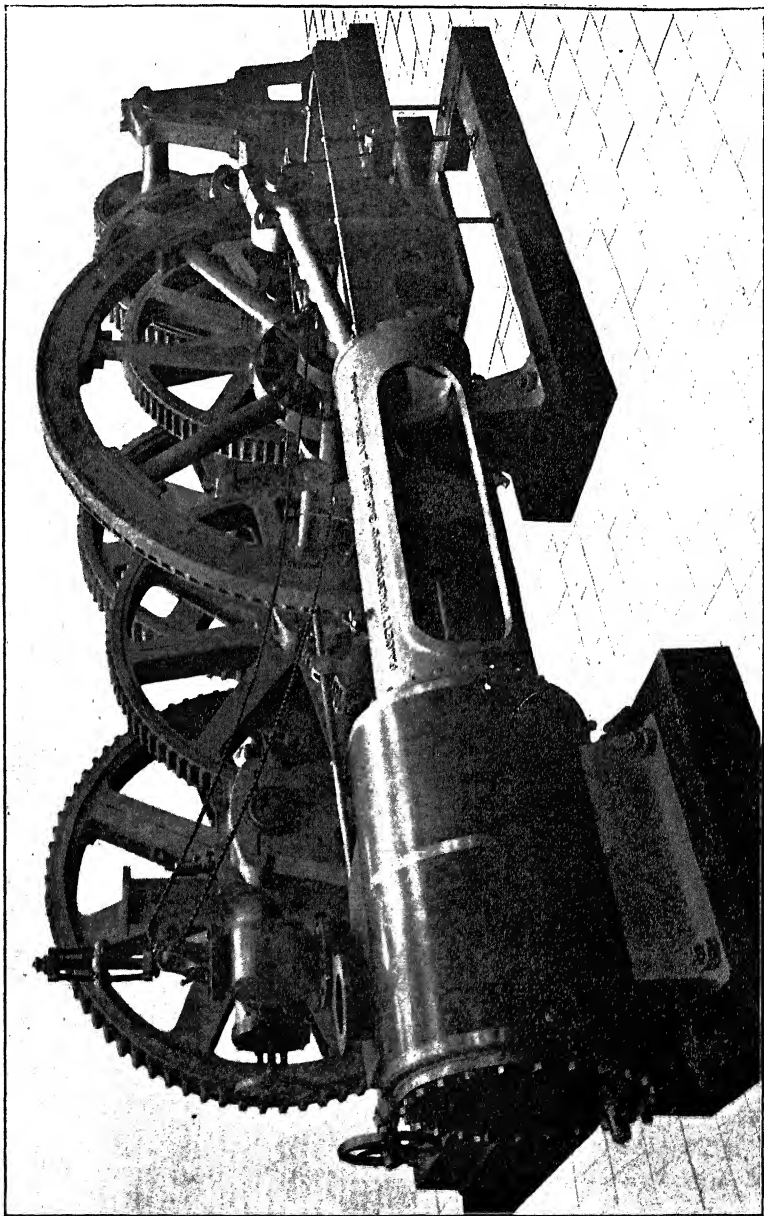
Engine and gearing for driving the plant shown in the preceding illustration.
